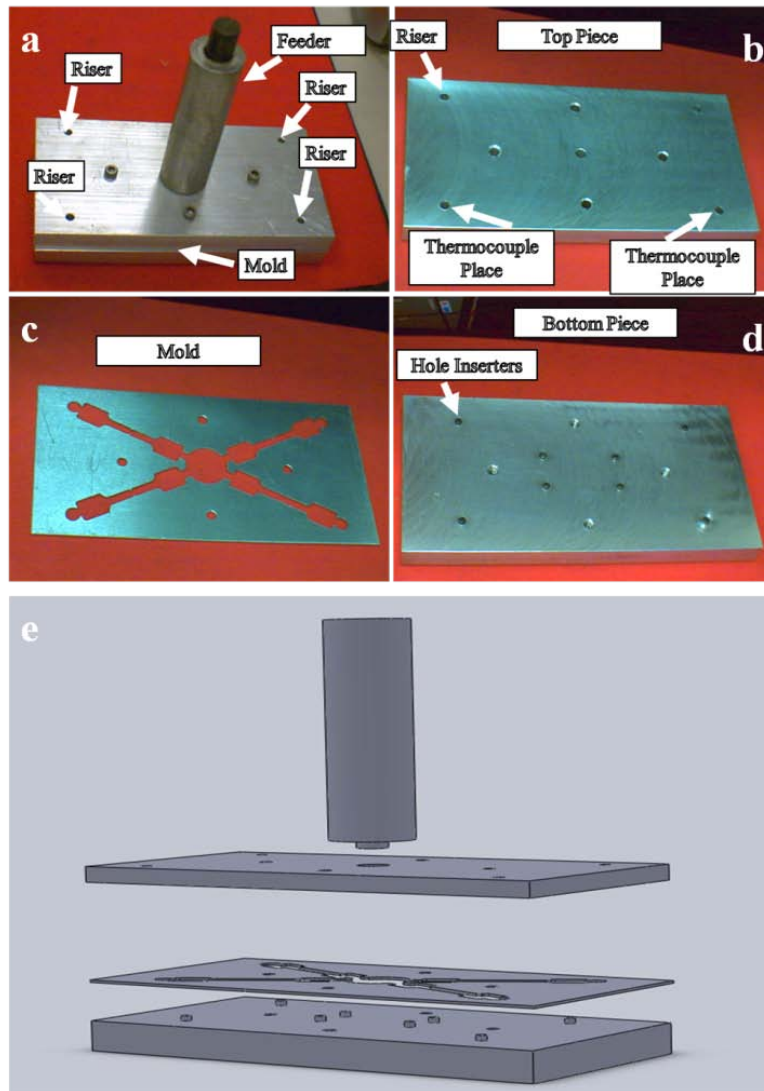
Casting device a) Current setup, b) Mould top piece with riser and thermocouple probes place, c) Mould with cavities for four samples, d) Mould bottom piece with end-holes-inserter, e) Schematic of the disassembled casting device
